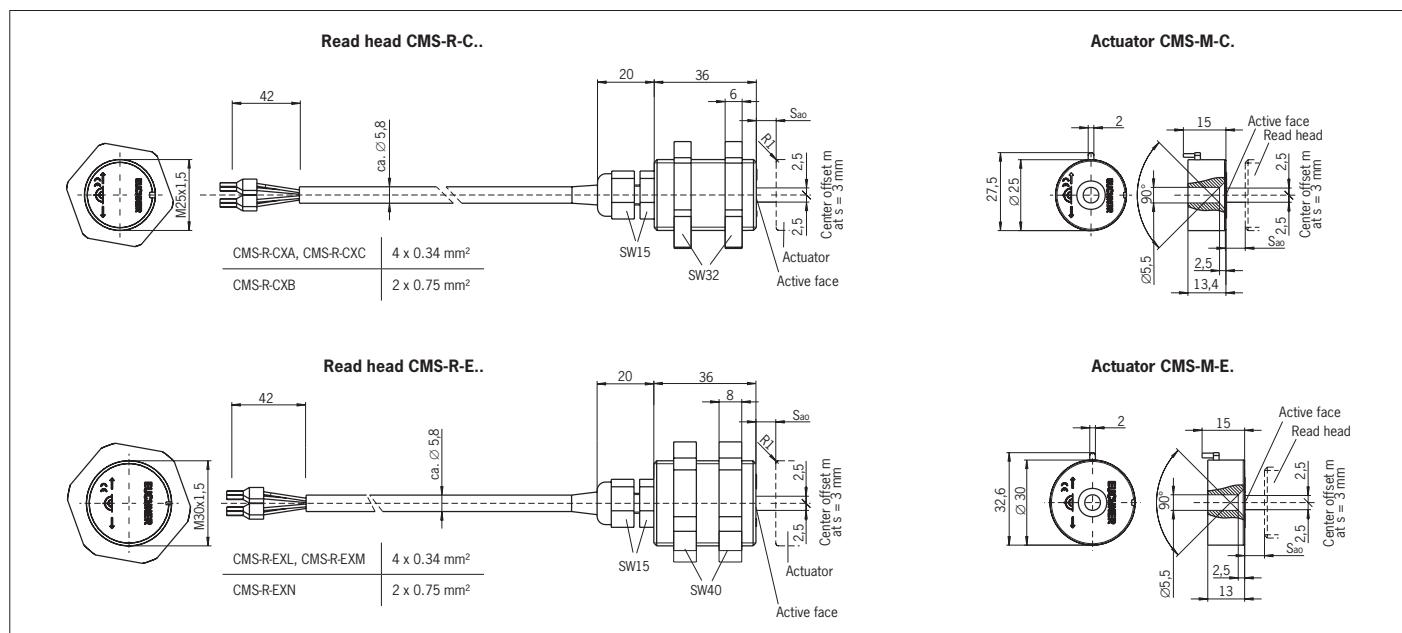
Dimension drawings for read heads CMS-R-C.. / CMS-R-E..
